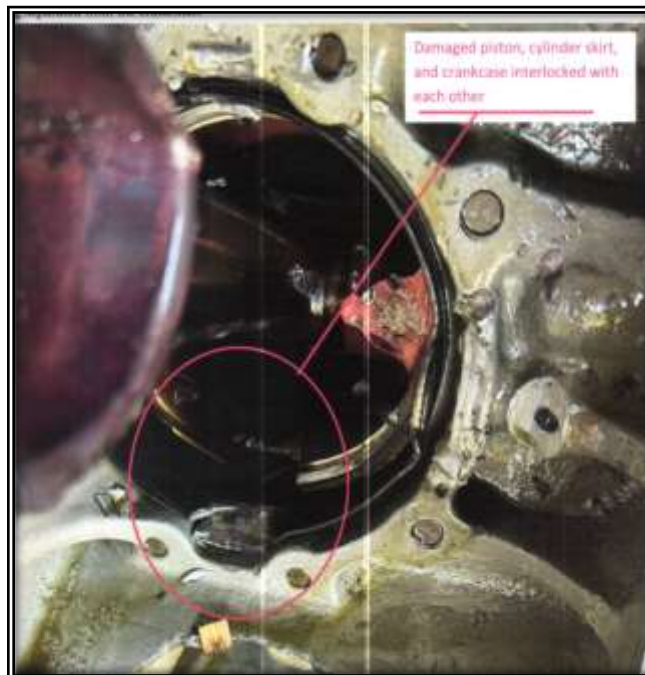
Damaged piston, cylinder skirt and crankcase interlocked with each other.
